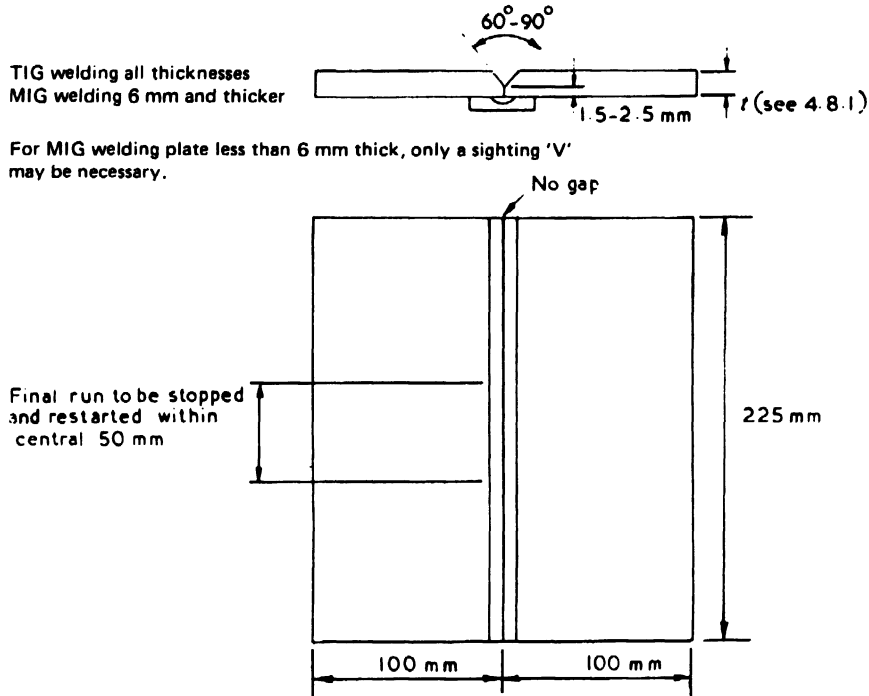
Test piece for butt weld in plate (with temporary backing)
